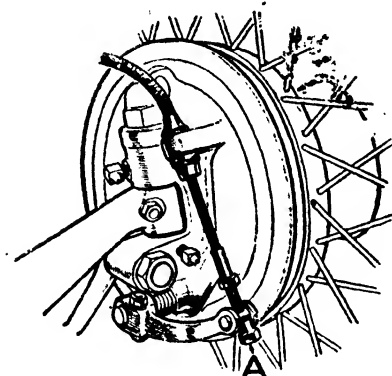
ANOTHER FEATURE OF THE FORMER AUSTIN TEN BRAKES WAS THE PROVISION OF ADJUSTING NUTS (A) ON THE FRONT OPERATING CABLES
